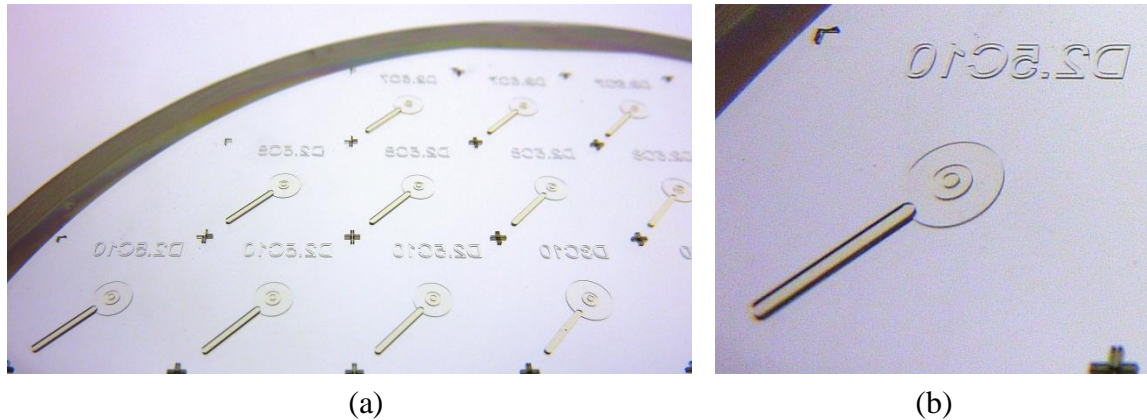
(a) SU-8 master mould with different valve designs for hot embossing. (b) Close-up view of one valve mould structure.
